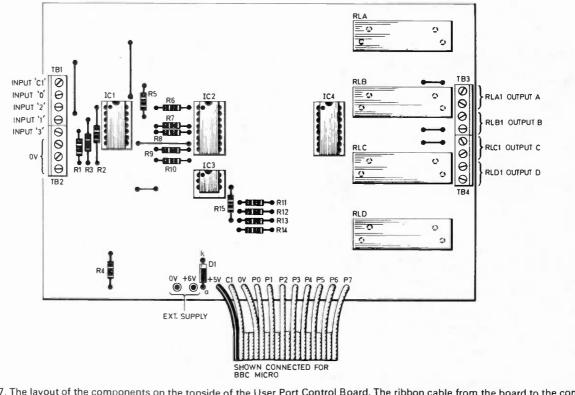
The layout of the components on the topside of the User Port Control Board. The ribbon cable from the board to the computer is drawn here for the BBC Micro. Note that CA1 is used on this board, and forms the fifth input. The p.c.b. layout shown is an improved version of the original seen in the photographs.
